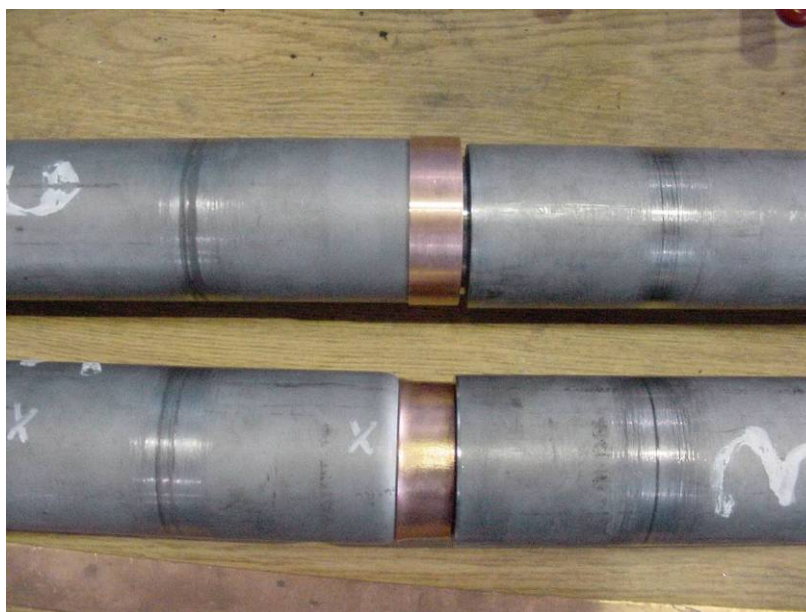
MA956/MA956 Assembly for Magnetic Pulse Welding with Copper Coupling Sleeve. Before and after weld showed upper and lower, respectively.
